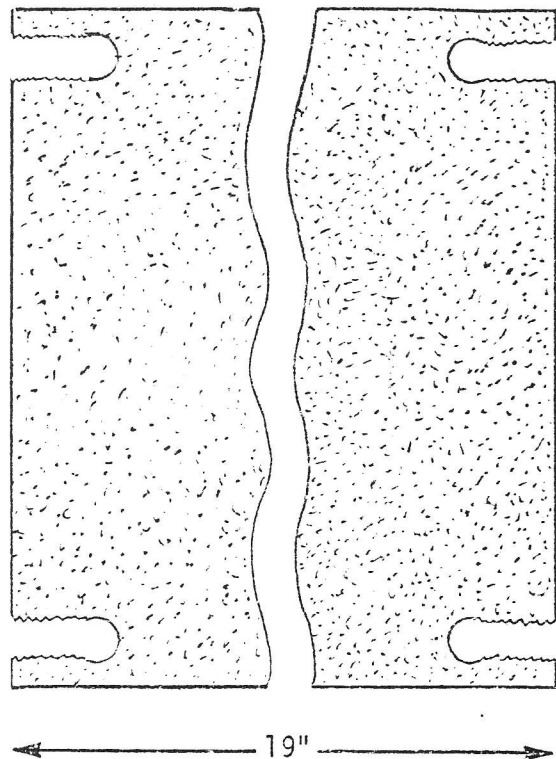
Slots are rough sawed out. Cut slightly inside and smoothen cut edges with flat file.
